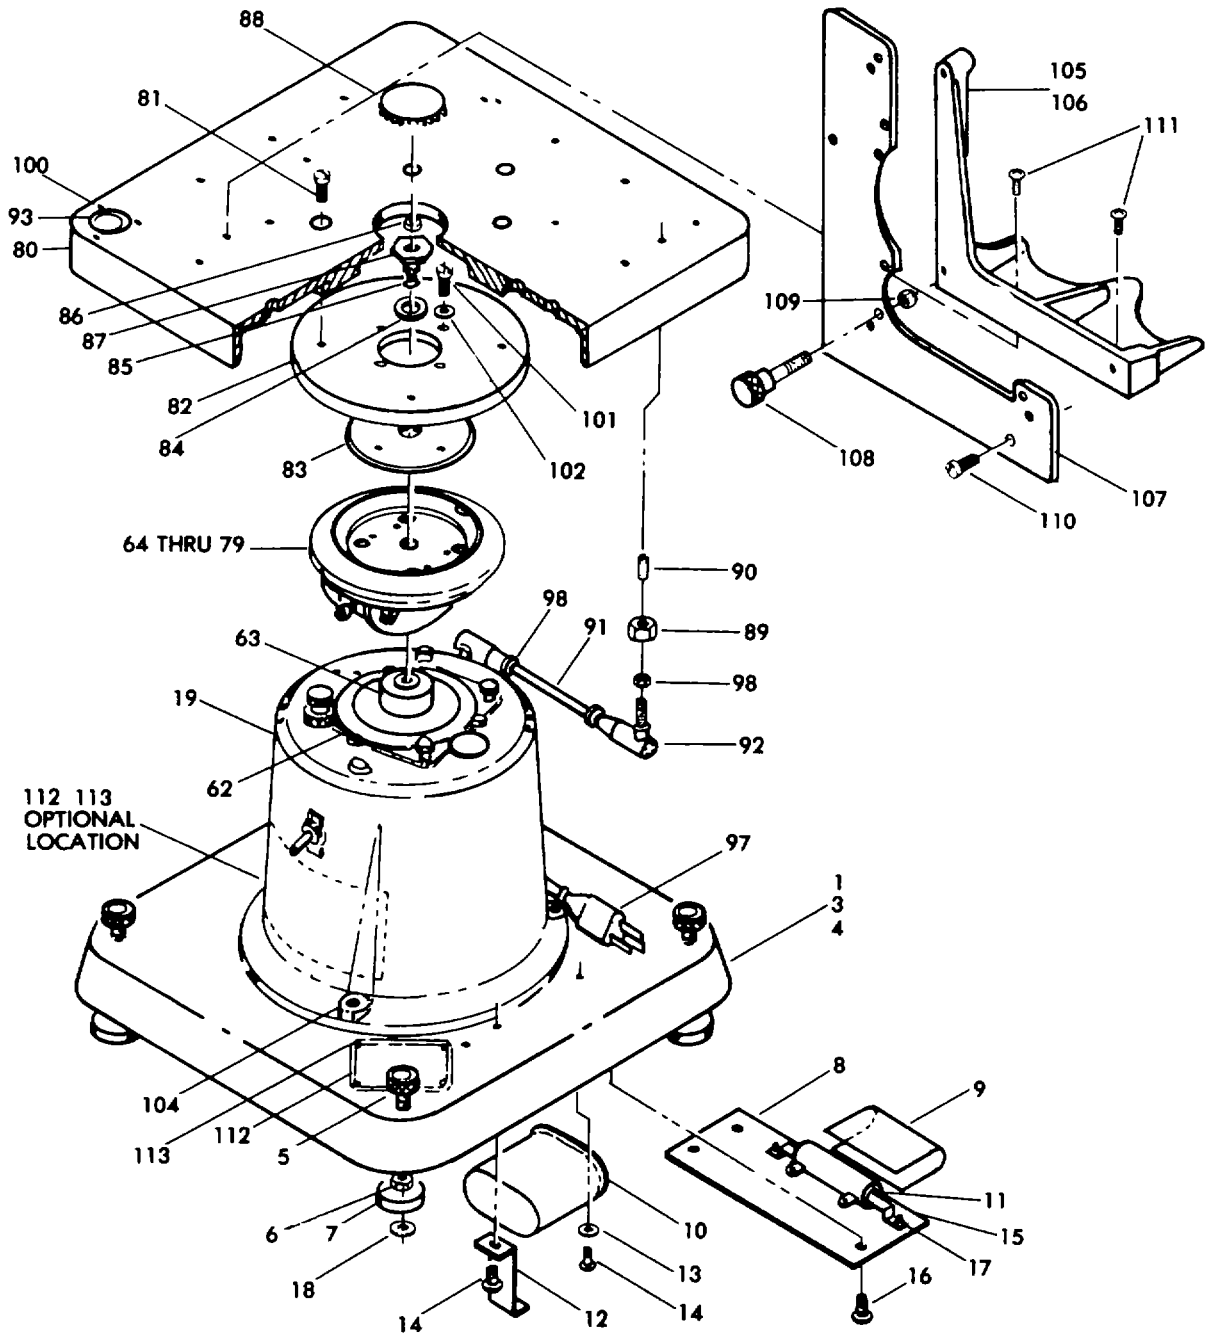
Gyro Tilting Table, Exploded View (Sheet 1 of 2).
